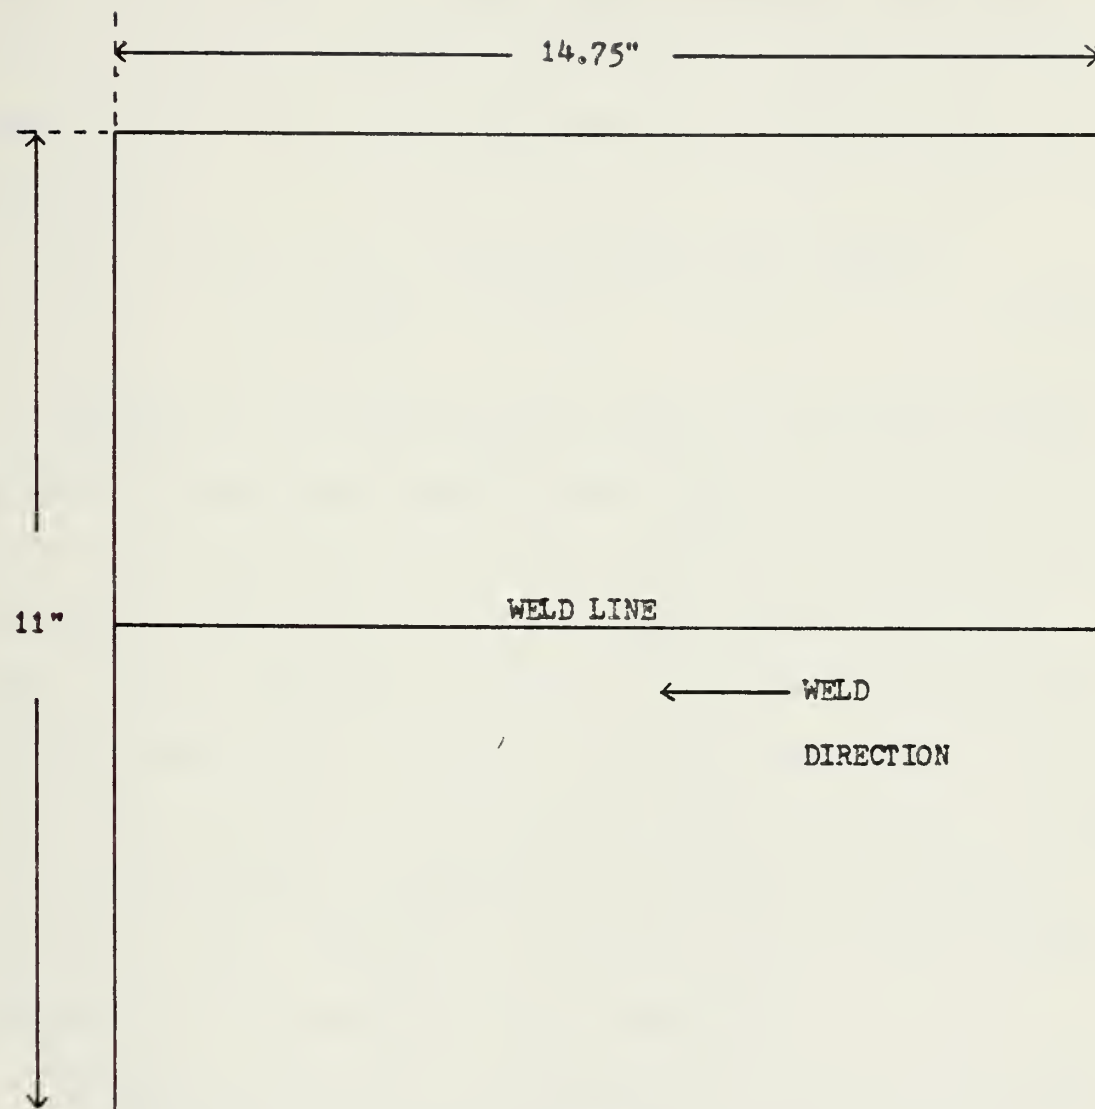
LASER WELDING SPECIMENS I, II, III, and IV
